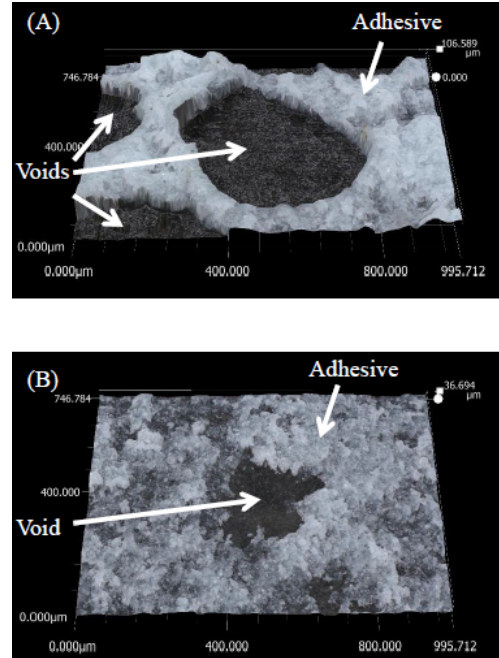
(A) and (B) are 3D views of the fracture surfaces in Fig. 5 (B) and 6 (B), respectively.
